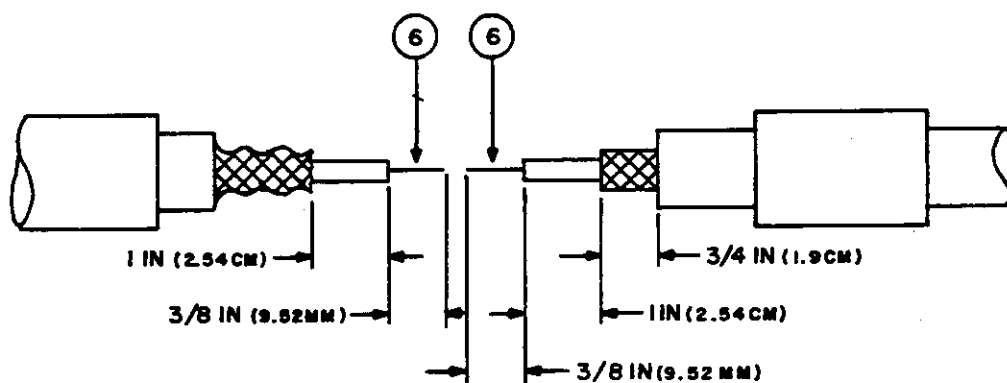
Heat-Shrink Tubing Method For Splicing Armored RG-11A/U Coaxial Cable—continued.
